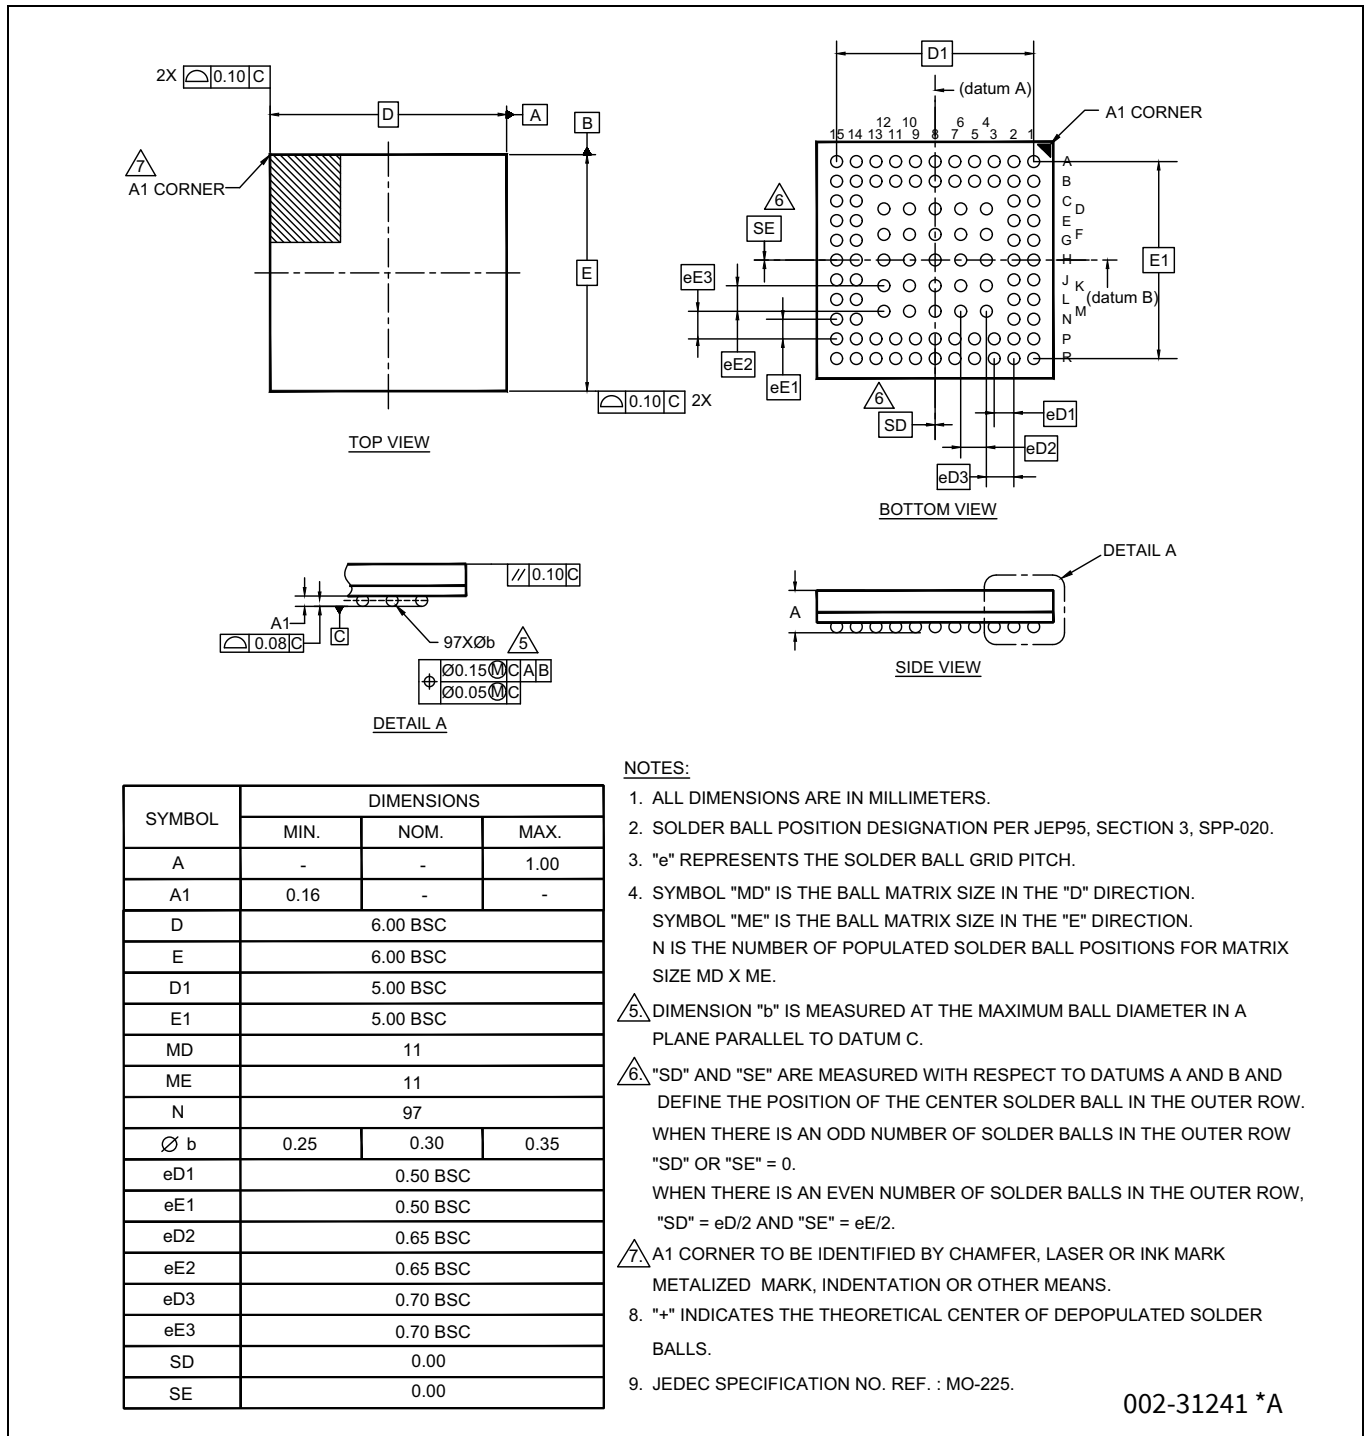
97-ball BGA multi-pitch (6 × 6 × 0.5 mm/0.65mm), 6.0 x 6.0 x 1.0 mm package outline
